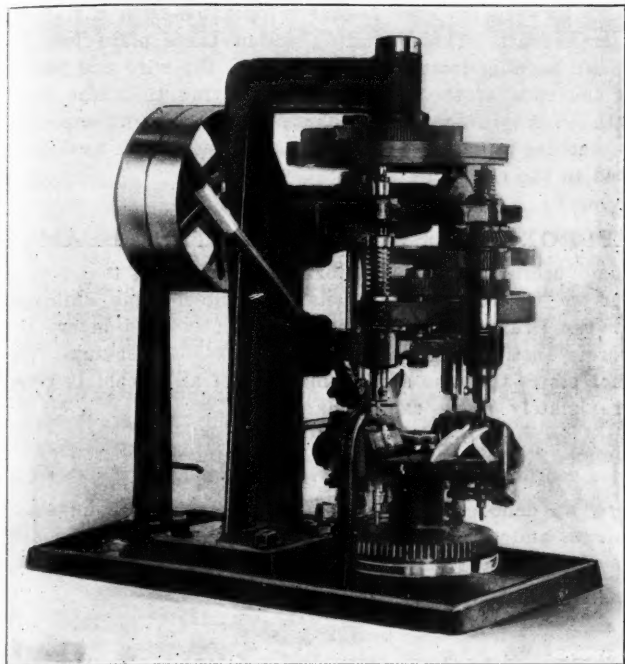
The Pendant Drilling, Counterboring and Tapping Machine
